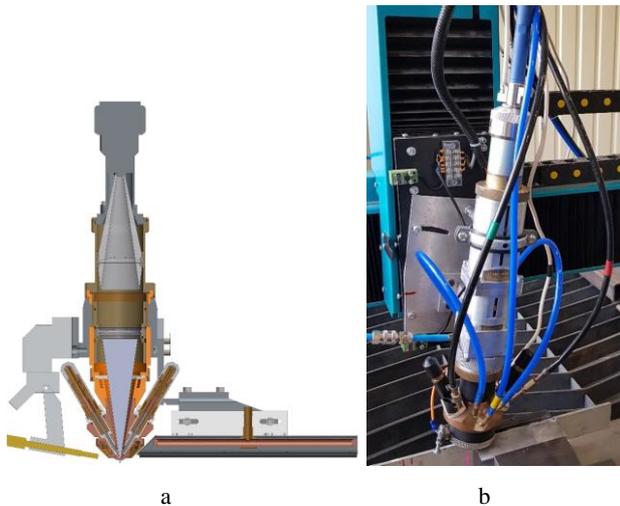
a–3D model; b–external view of the head for laser and laser-plasma welding, developed at the E.O. Paton Electric Welding Institute
